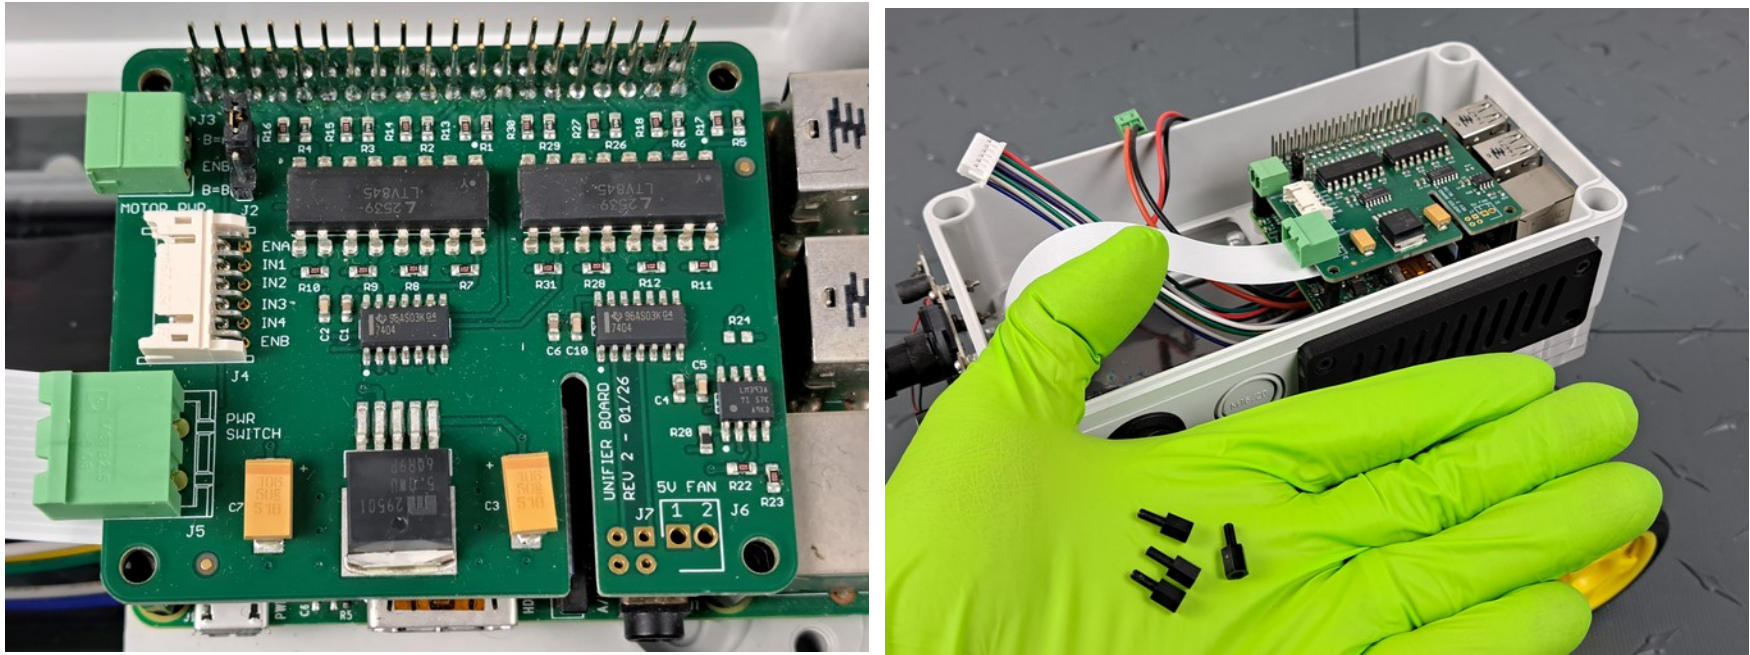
Check alignment of Unifier GPIO board with Raspberry Pi.
